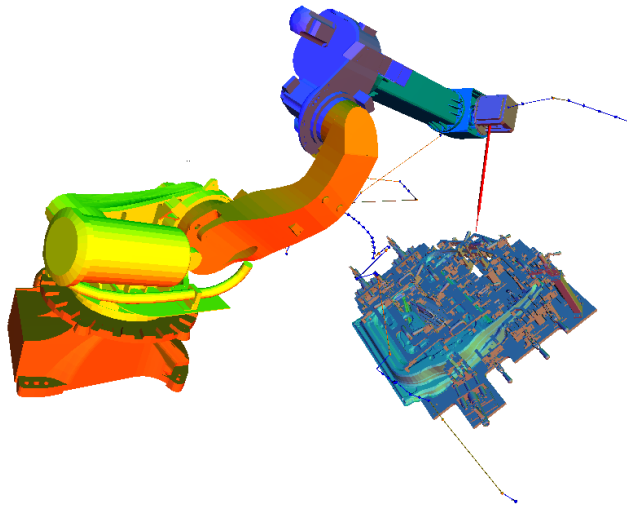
RLW robot welding a car front door, positioned in a fixture. The broken line indicates the path of the robot's scanner head, with blue sections standing for movement while welding and yellow sections for idle movement.
